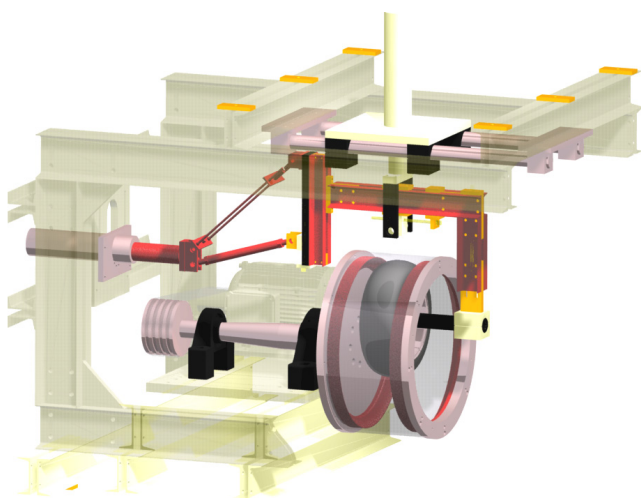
BiAxial Wheel Test Machine (LBF type “A”)
